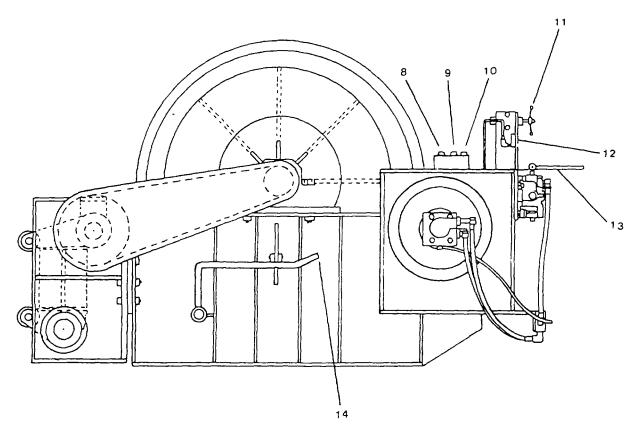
<u>Stern Anchor Winch (Sheet 2 of 4).</u> 2-124
